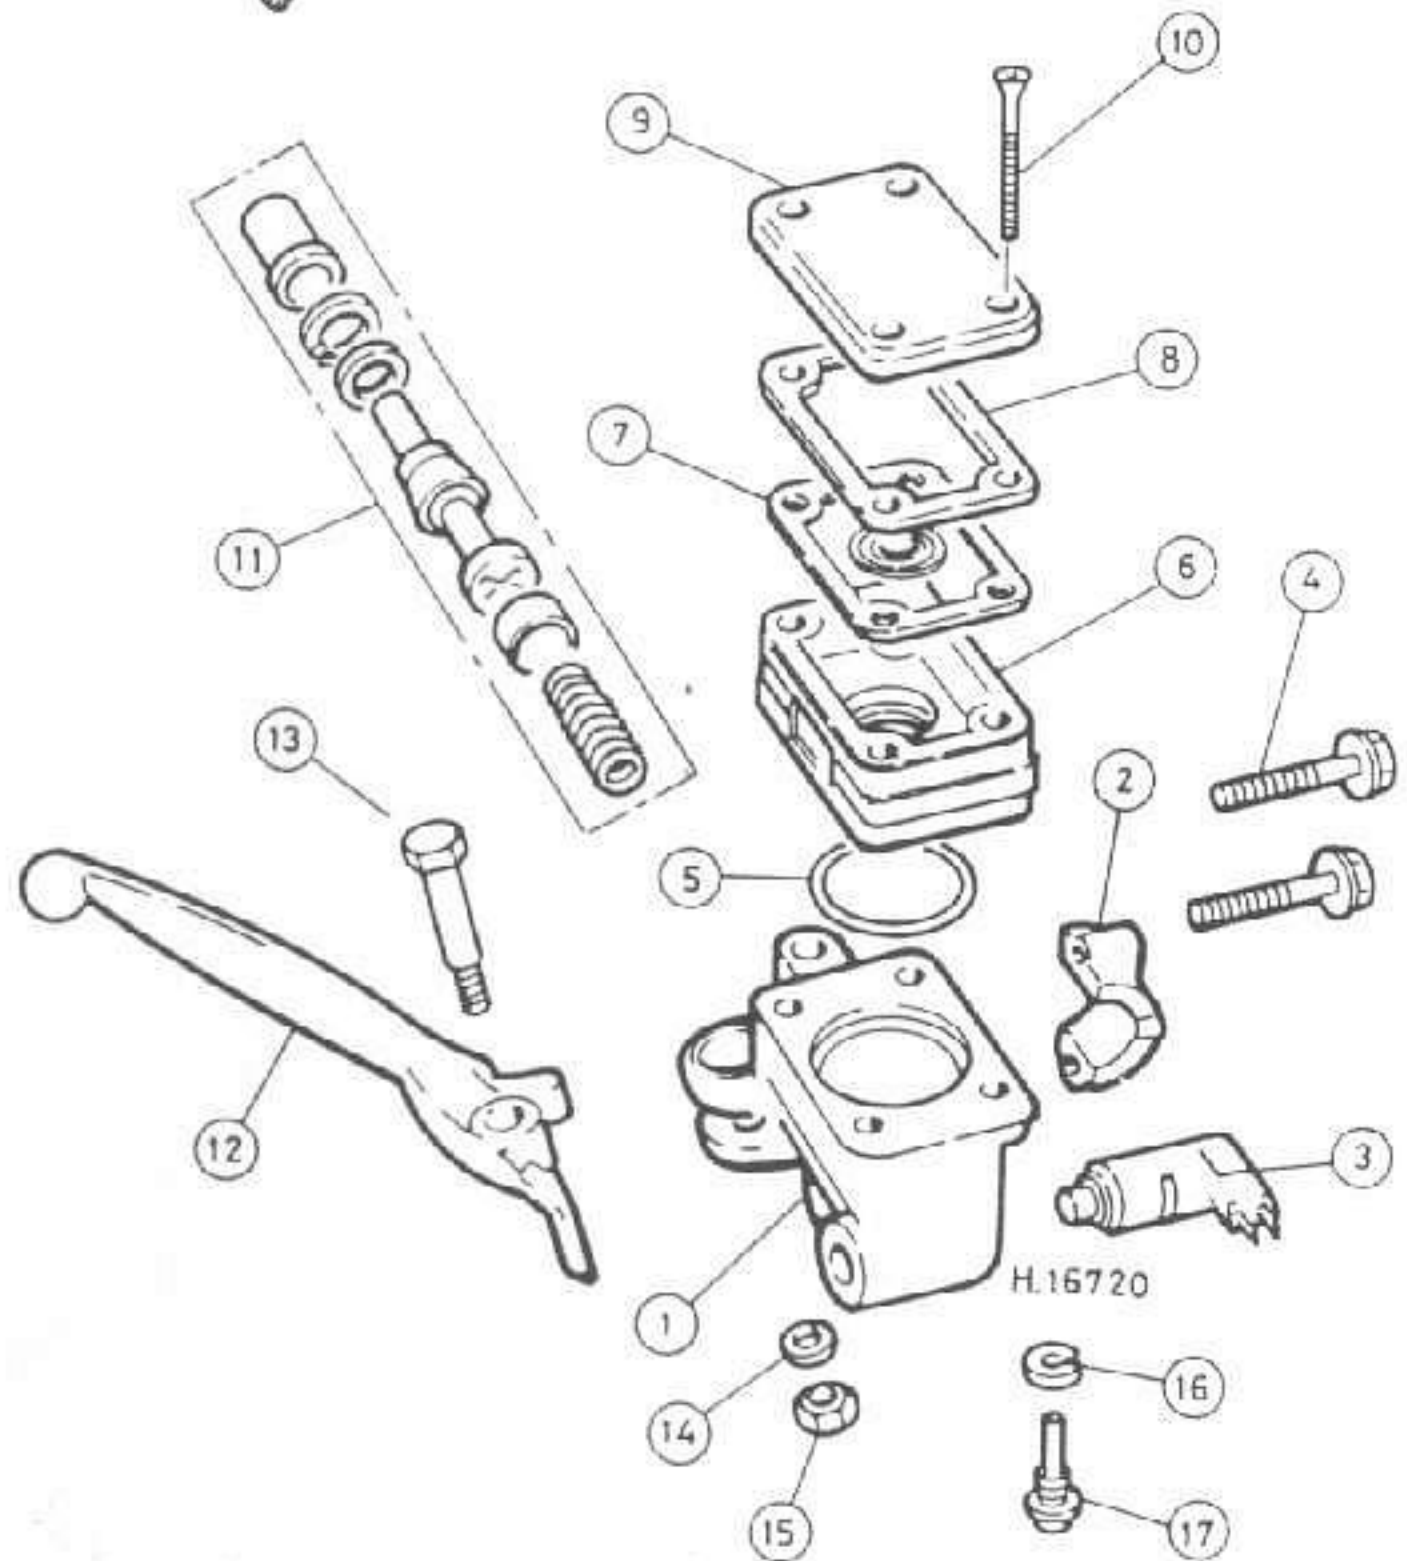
Front brake master cylinder - CX500, CX500 1978
